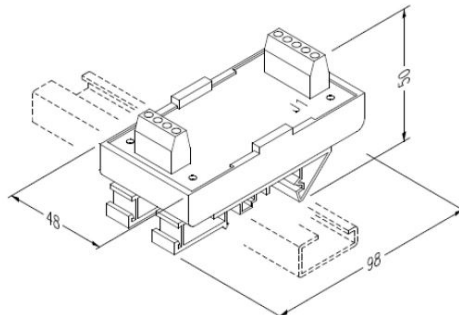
Layout and Dimensions with plastic DIN rail mounts (supplied)
